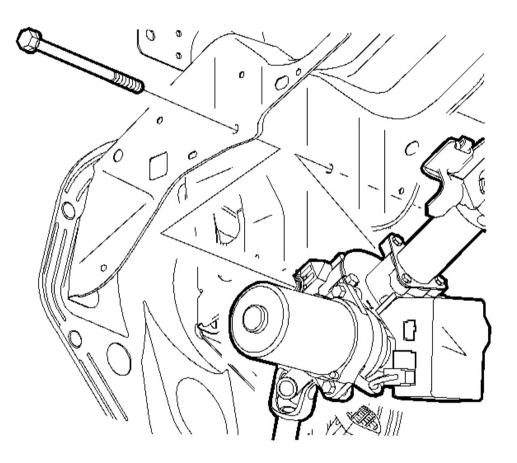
Lower Column & Mounting Bolt Courtesy of GENERAL MOTORS CORP.
